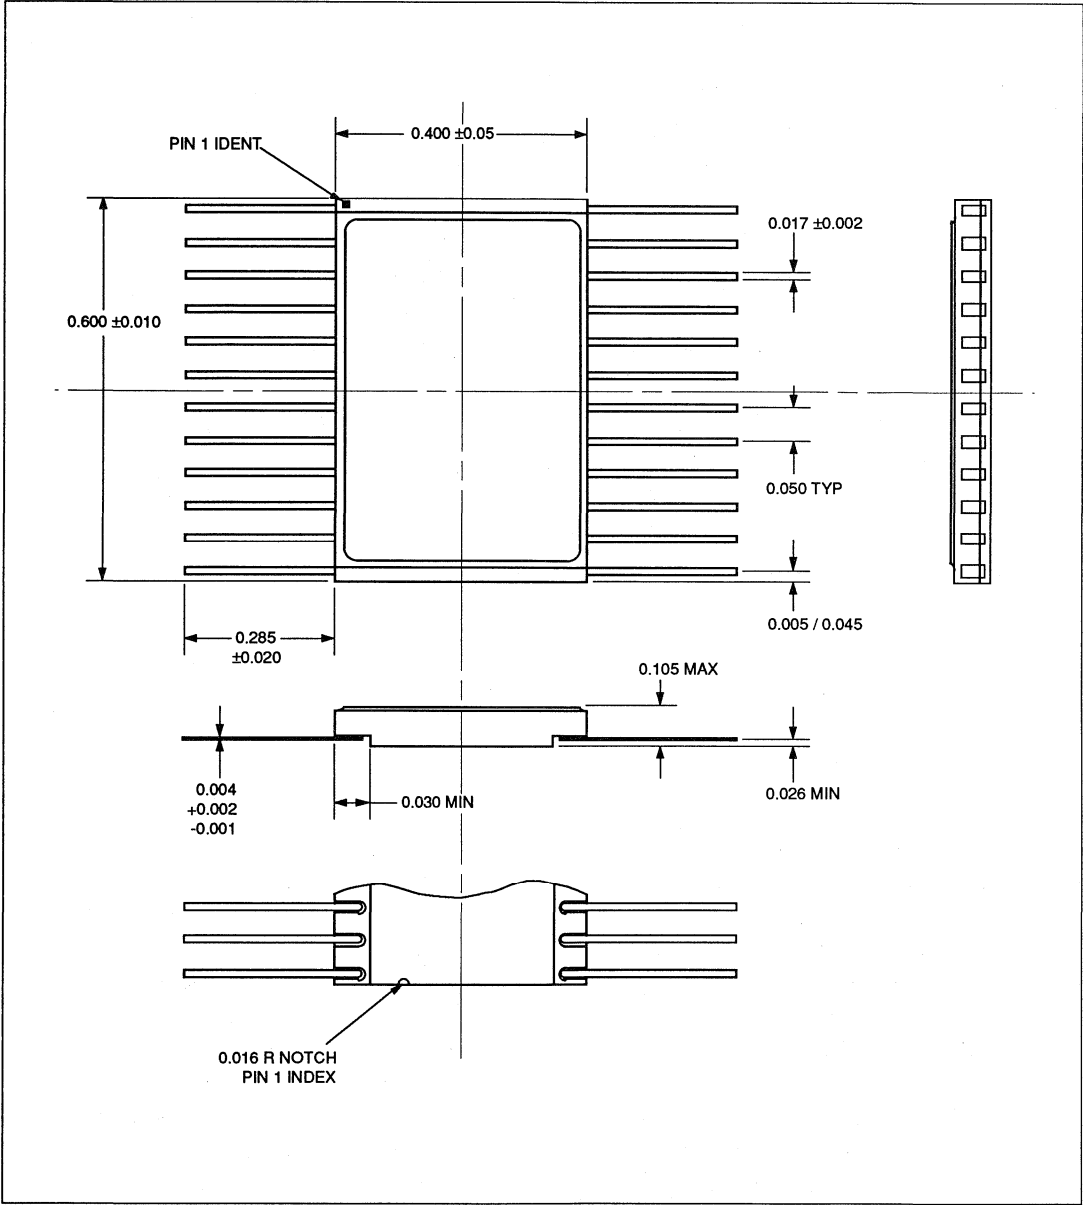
24-Lead Ceramic Flatpack (Solder Seal) - Package Style F
